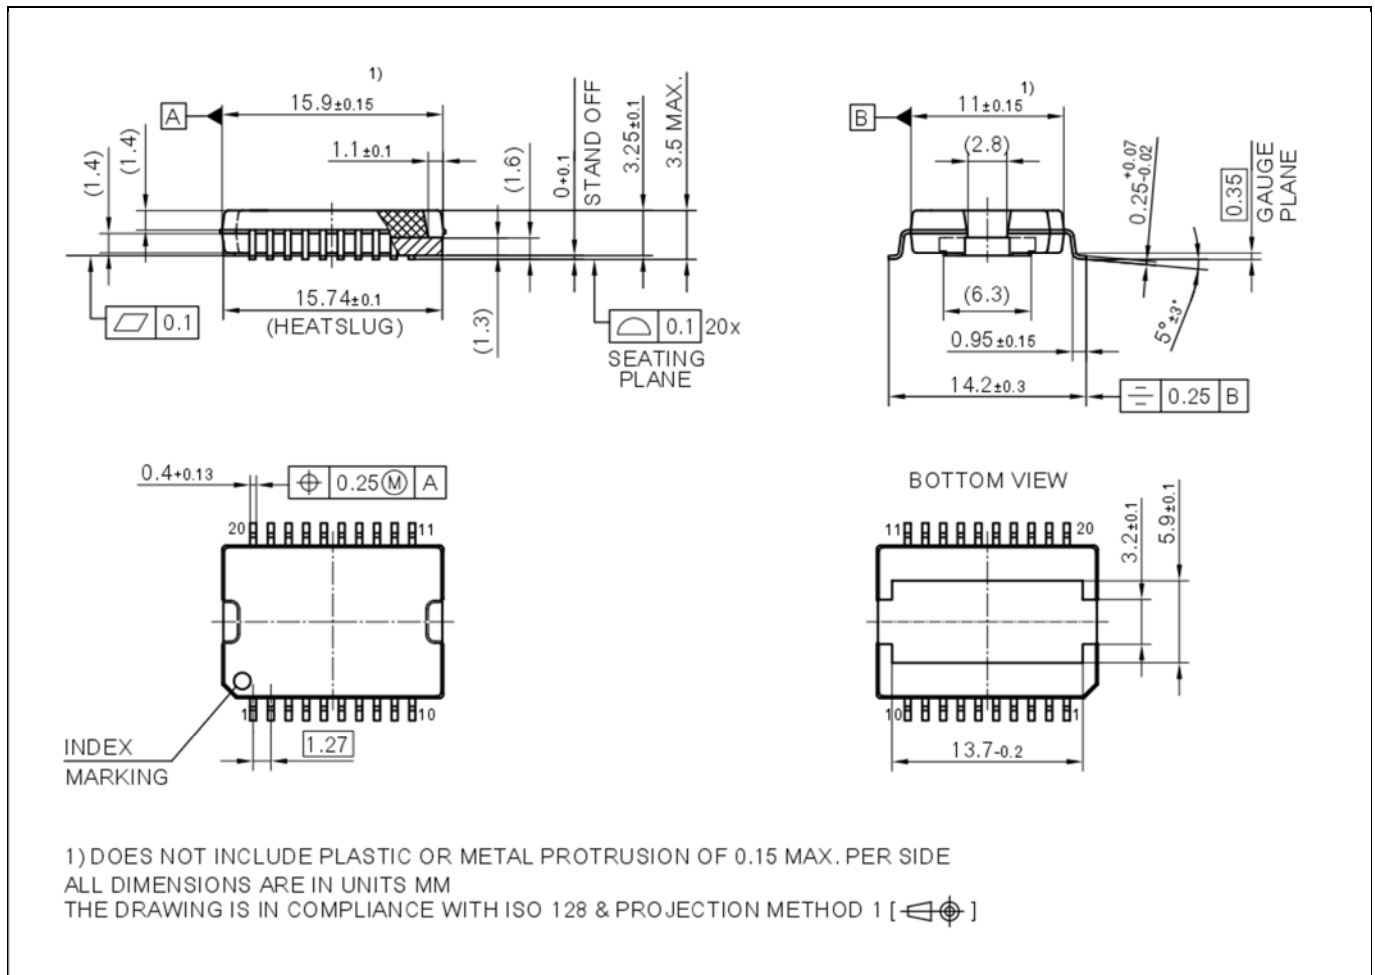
PG-DSO-20-85 Package Outline, dimensions (mm)
